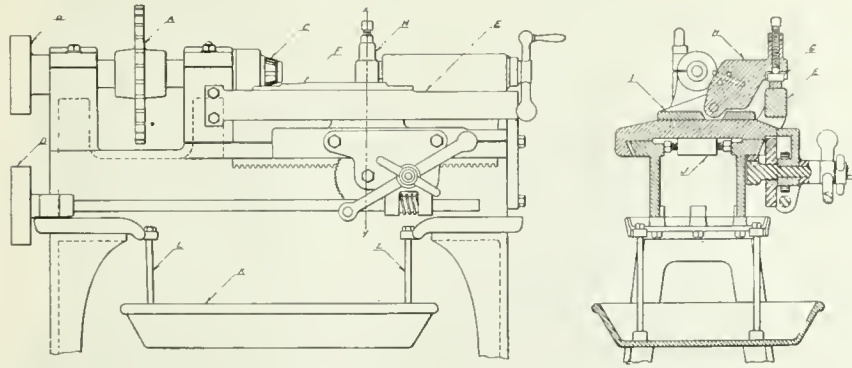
DETAIL OF SPECIAL ROUGH TURNING LATHES.
